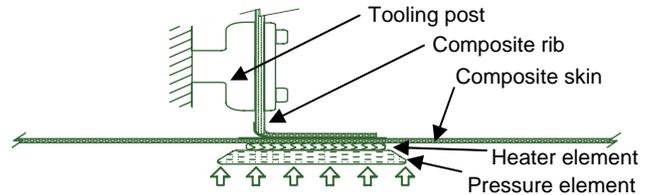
Possible LTTH Arrangement for Welding a Rib and Skin by TCW
